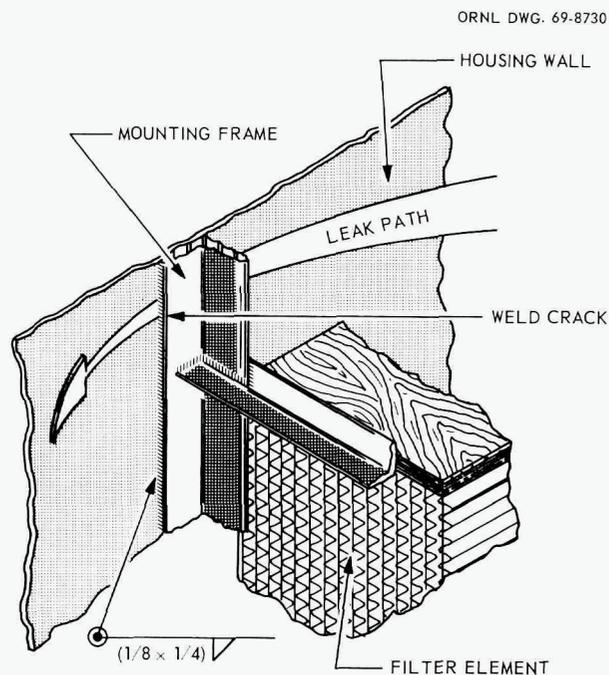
Acceptable method of seal-welding mounting frame to housing. Weld crack and leak path show how a fatigued weld could result in bypassing the filters.
